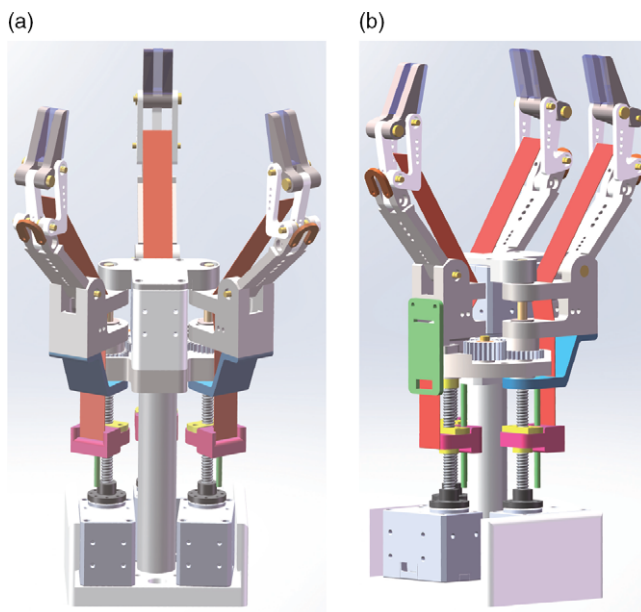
The SAU-RFC hand. (a) Front view and (b) side view.
